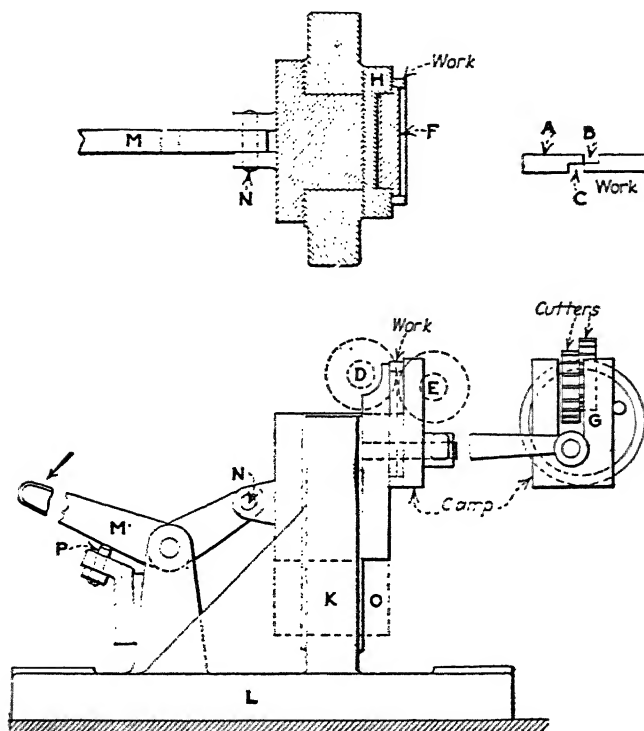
Fixture for Milling a Lap-Joint Piston or Packing Ring
